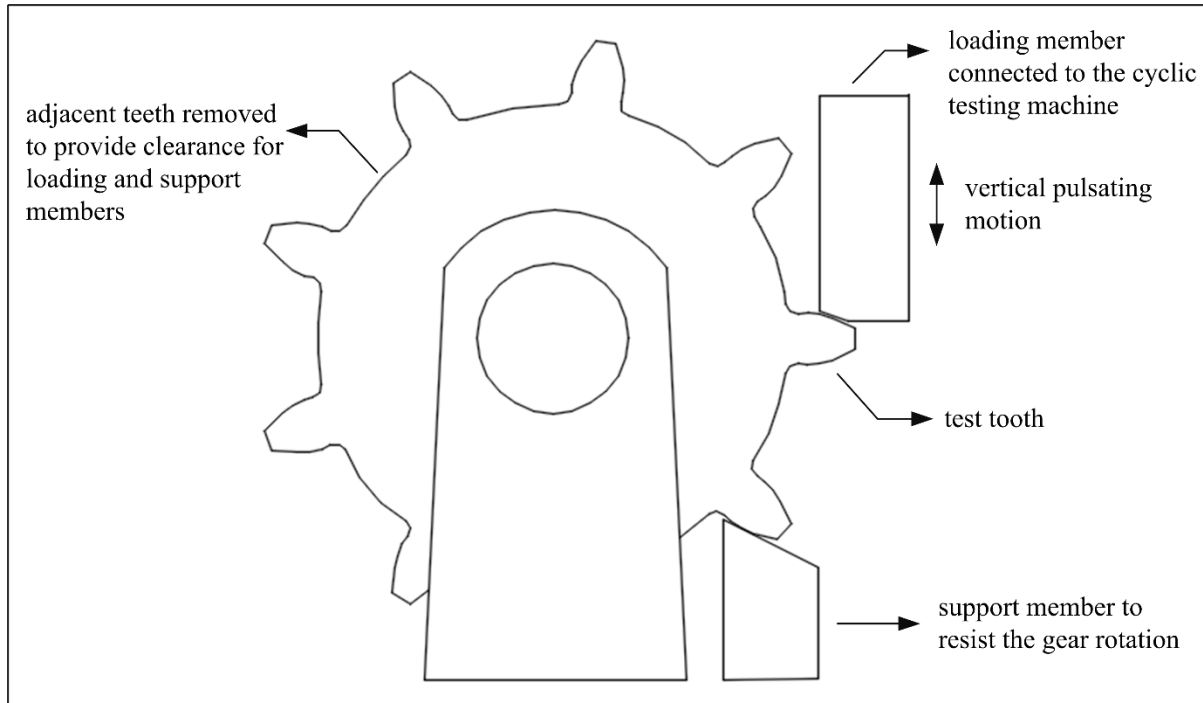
Schematic illustration of single tooth bending fatigue test.
